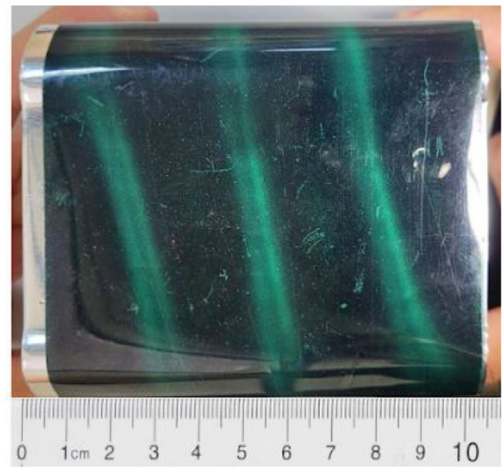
| Slider with a magnetic viewing film placed around the former.
